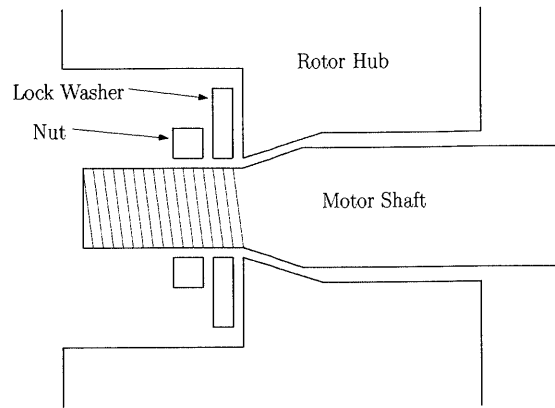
Alternative design for rotor attachment to the motor shaft.
